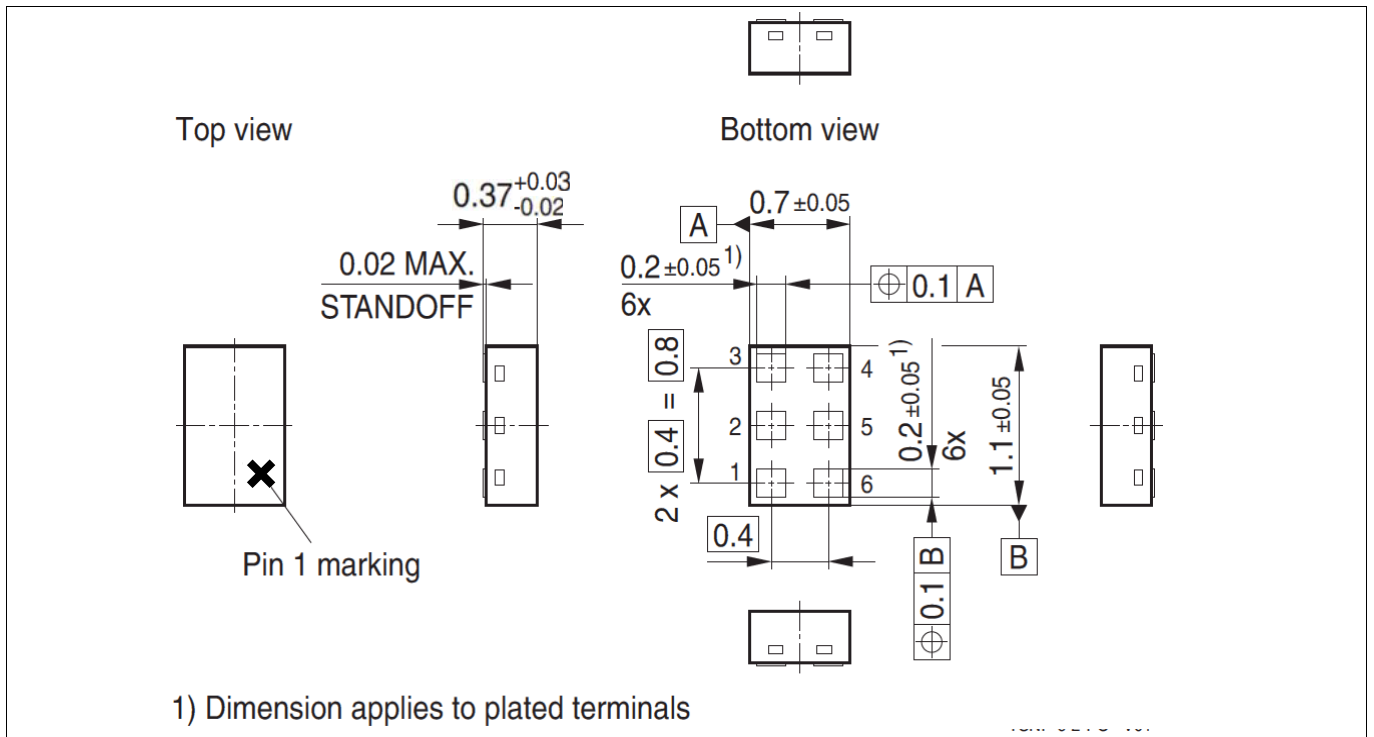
TSNP-6-10 Package Outline (top, side and bottom views)
